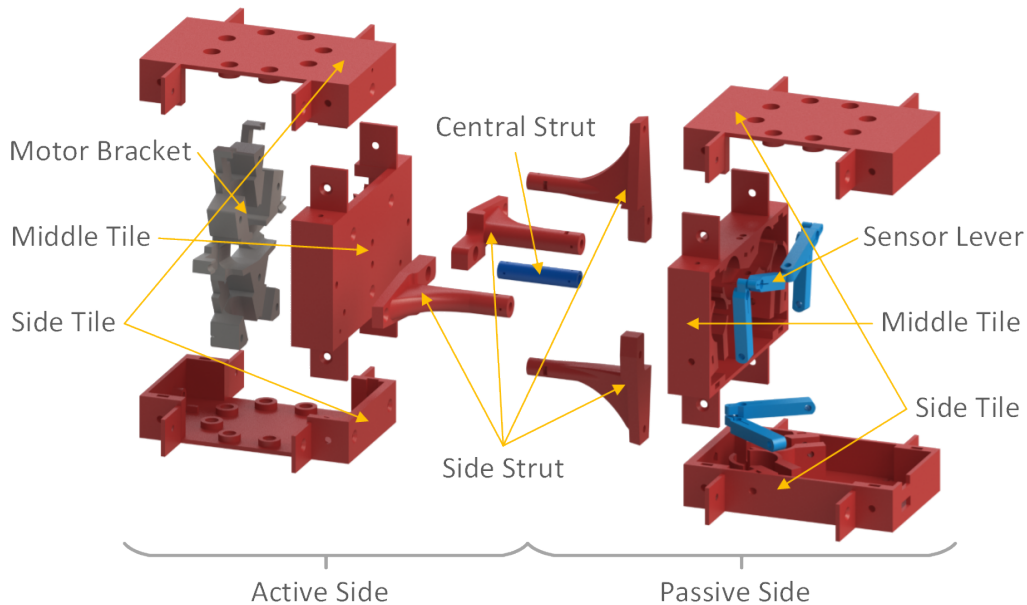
The essential structural parts of the tensegrity structure with sensory feedback in an exploded view. The parts on the left side constitute the active side which holds the motors, controller, and battery. The parts on the right side constitute the passive side which holds the sensors, sensory board, and secondary battery.
